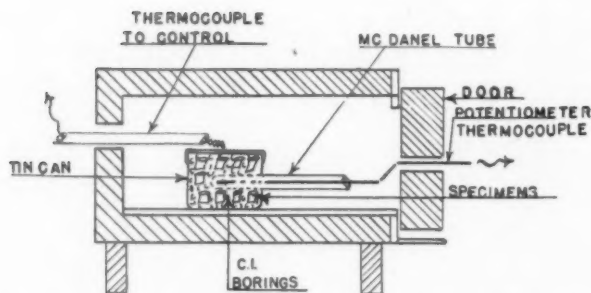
THE ANNEALING FURNACE WITH THE ANNEALING BOX USED TO HOLD THE SPECIMENS.
